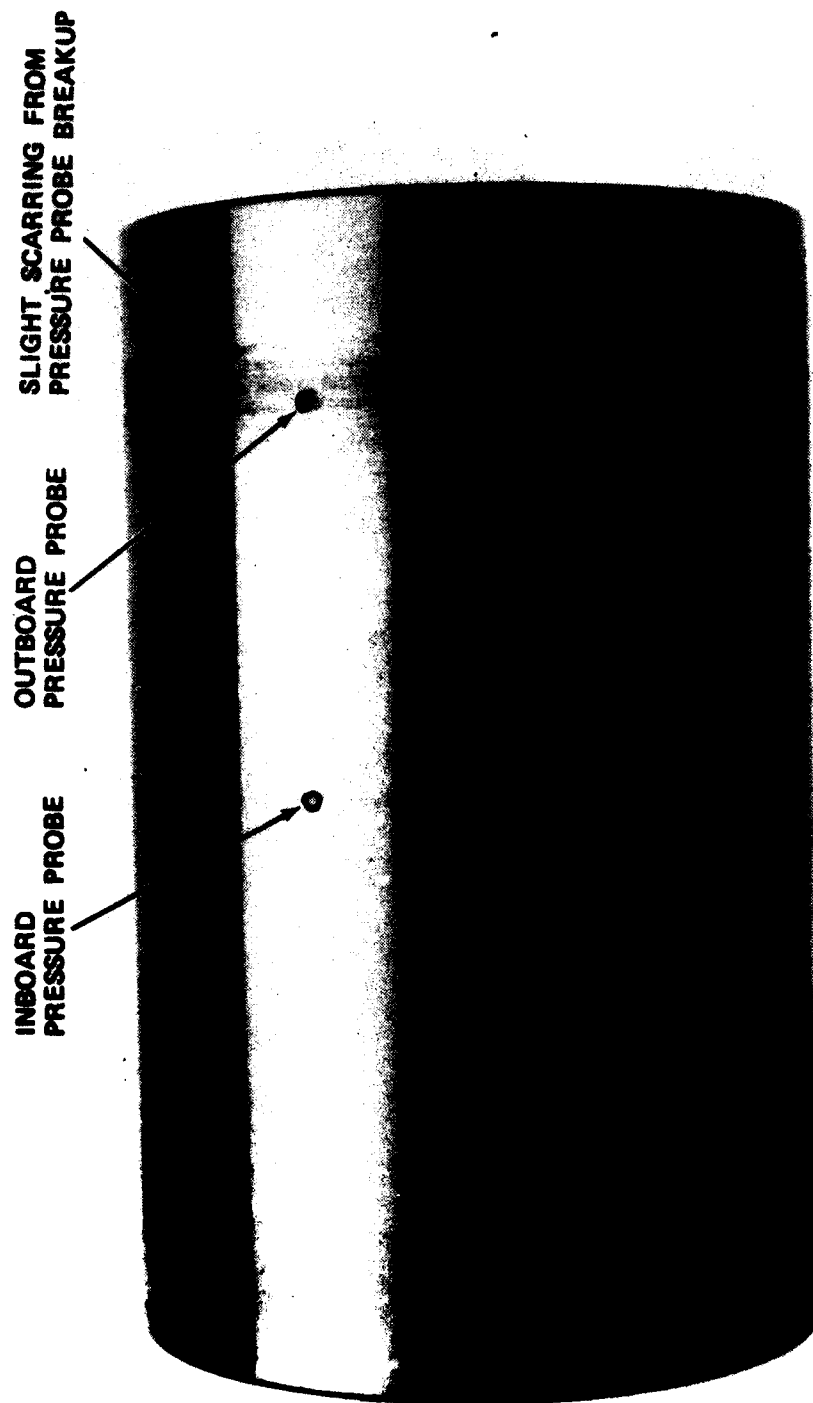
Instrumented Journal; Inboard Pressure Probe in Place. Outboard Pressure Probe Missing. Scarring is a Result of Probe Centrifuging Out and Breaking Up.
